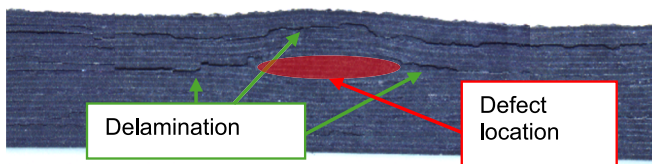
Failure mechanisms surrounding the defect observed after fatigue testing.
